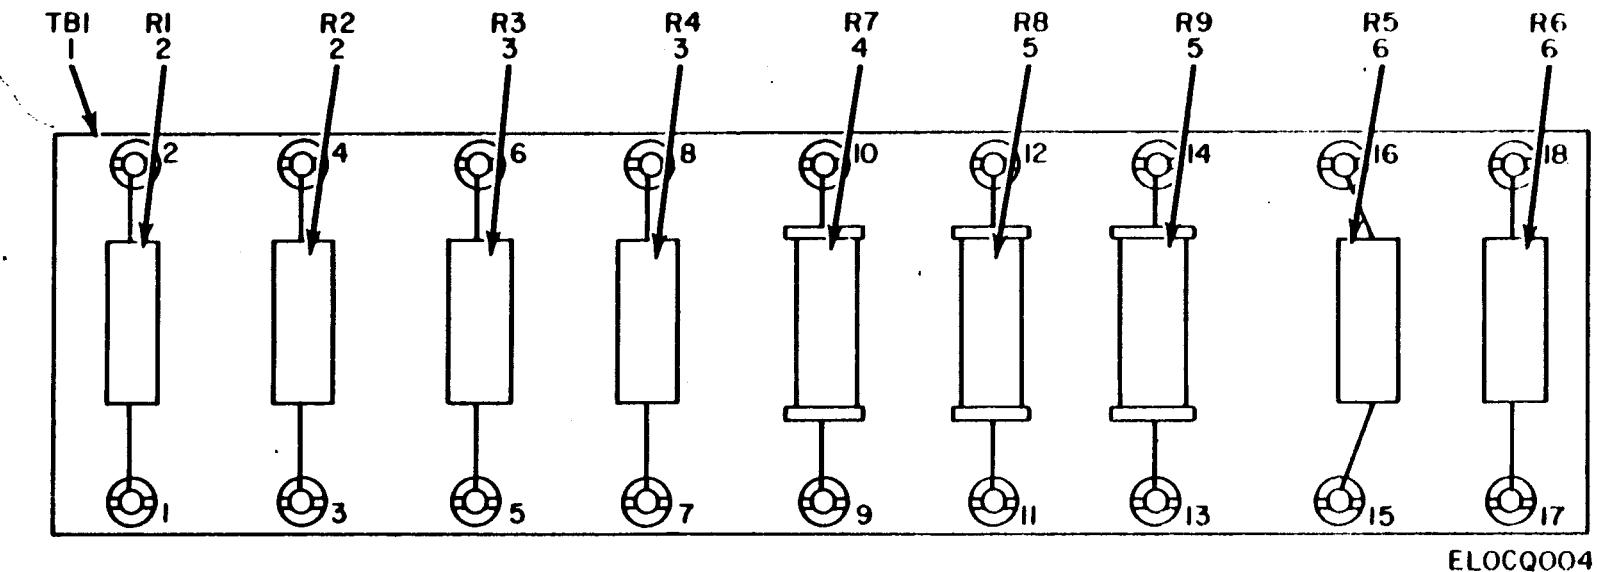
Test Set, Relay TS-1775/U, Terminal Board Assembly.
